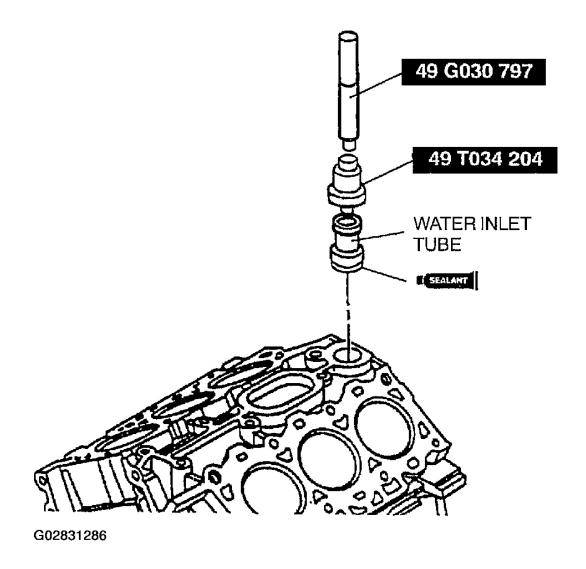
Installing Water Inlet Tube Courtesy of MAZDA MOTORS CORP.
